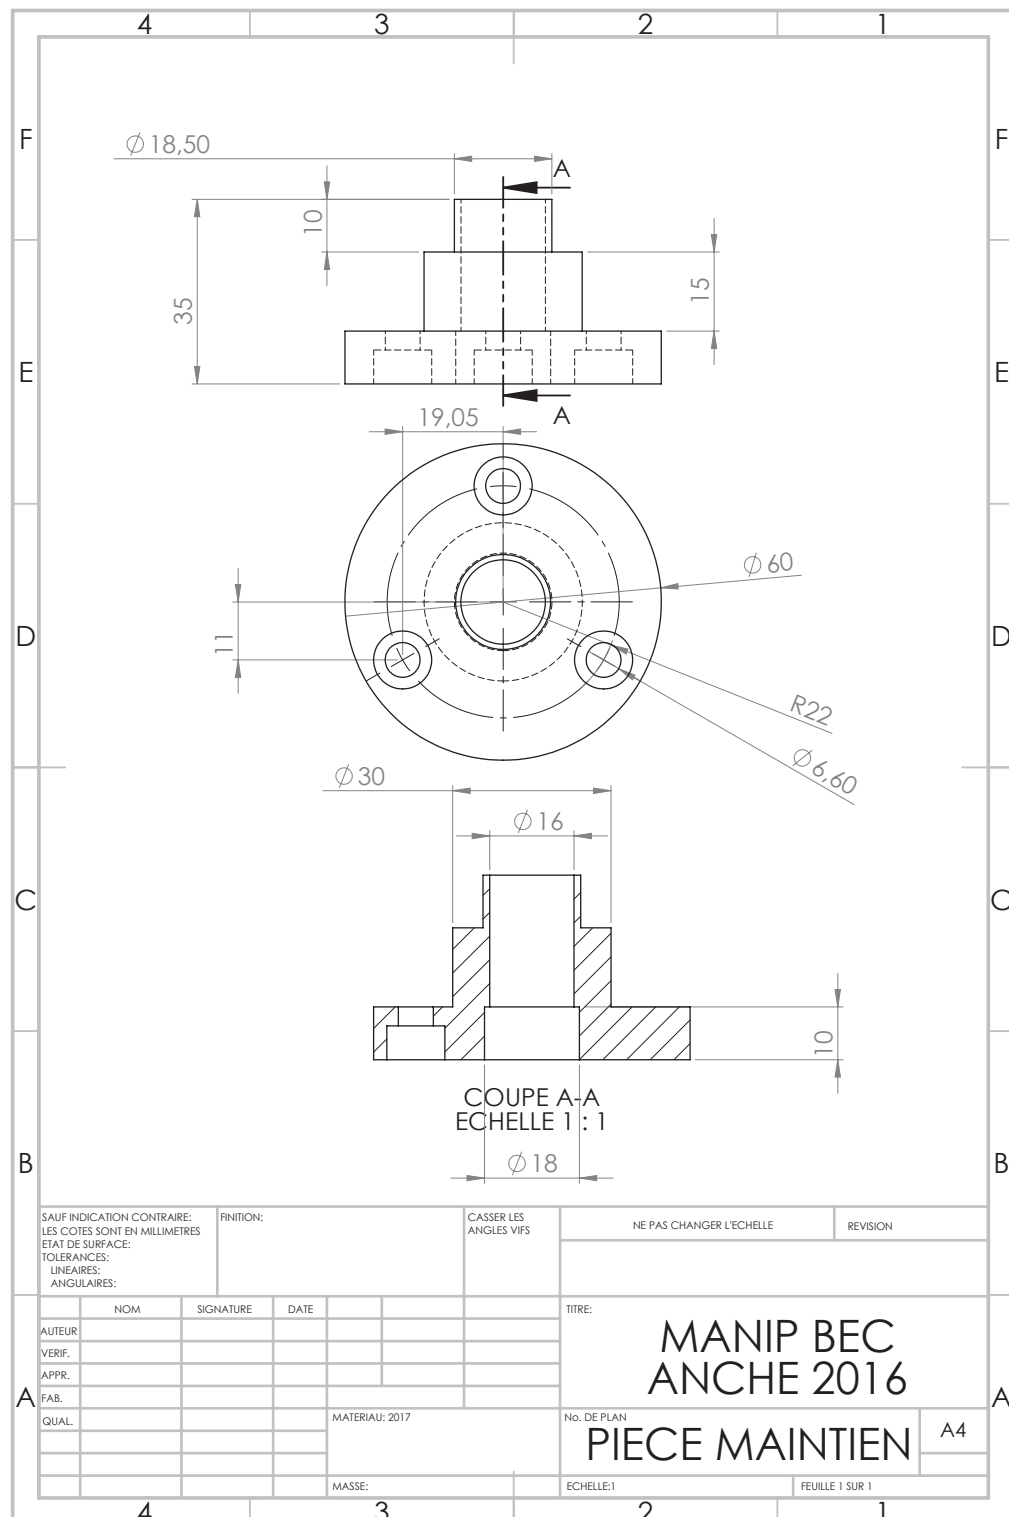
Dimensioned drawing of the junction mouthpiece-plate-resonator (7).
